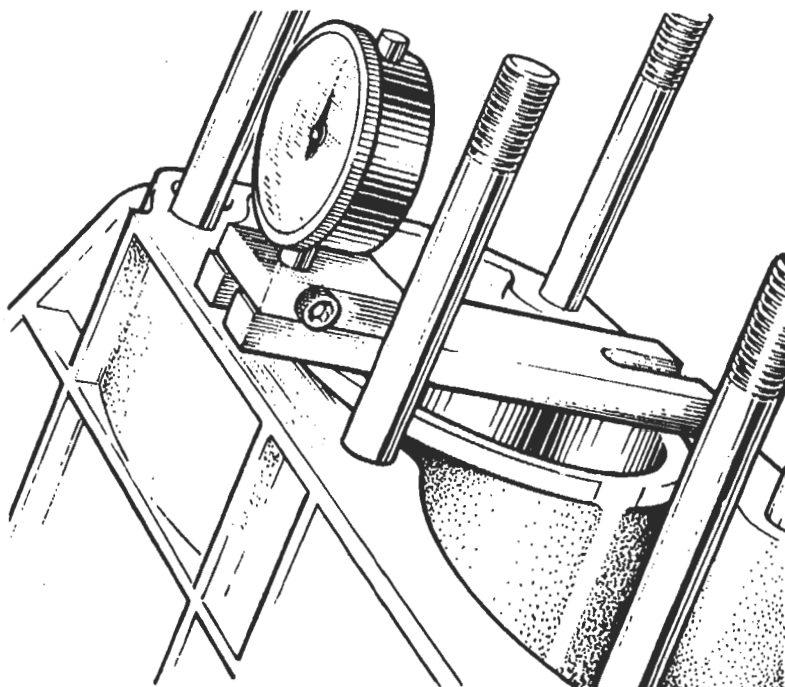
Using Tool T000T0003A to check cylinder liner height
